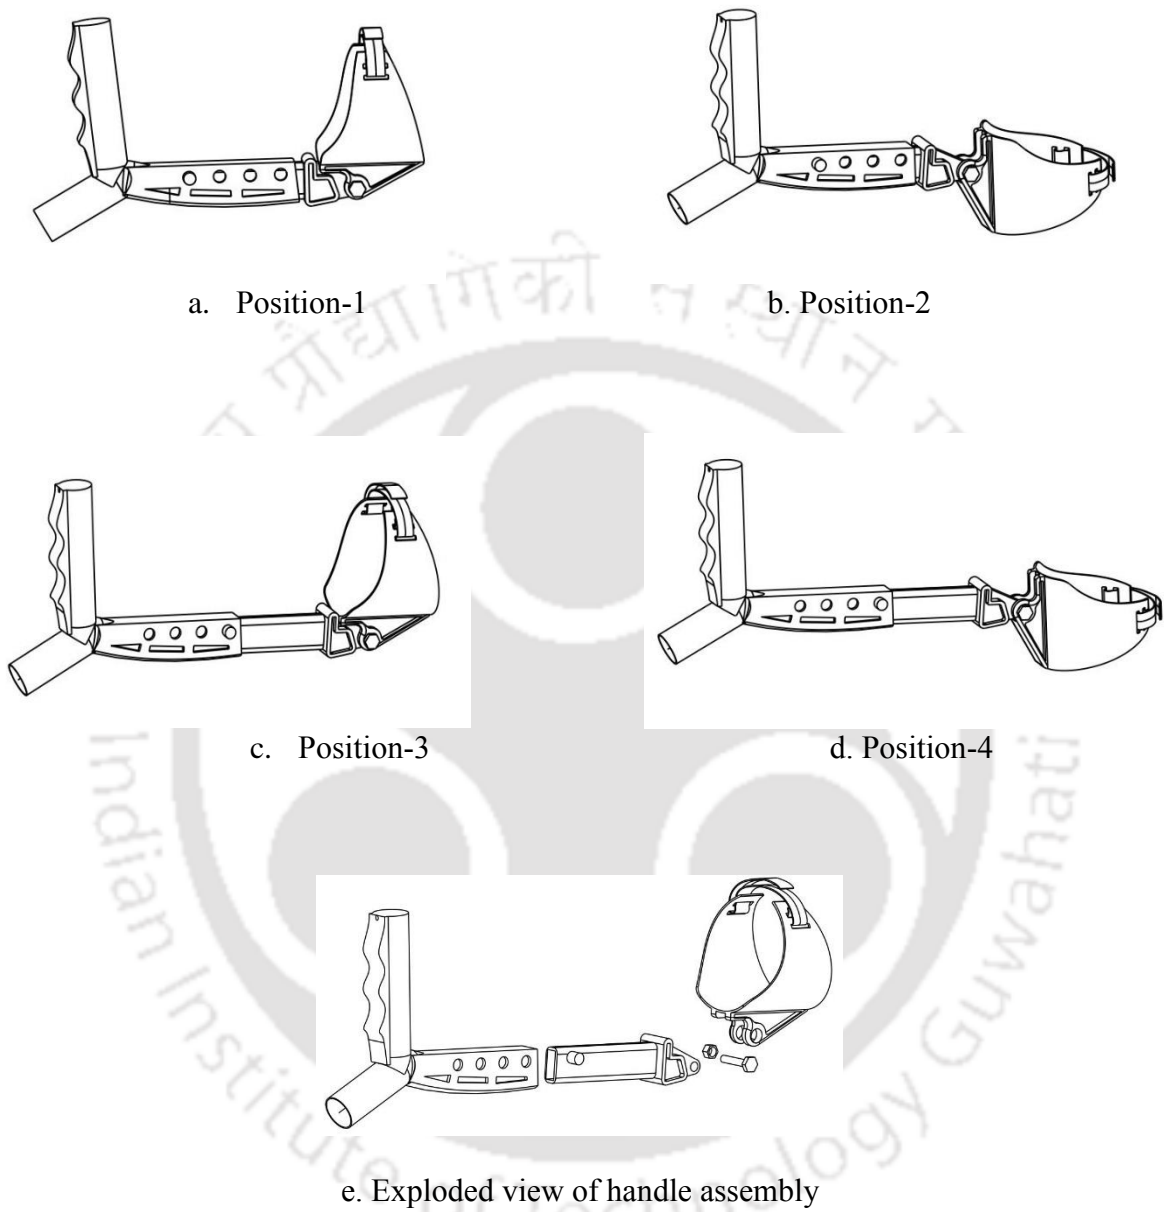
Handle with adjustable elbow crutch assembly (a, b, c, d and e)
